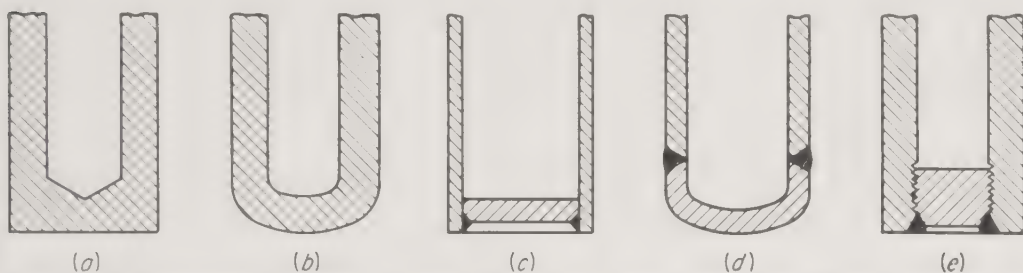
Permanent closures. [From D. Meigs, *Trans. Am. Inst. Chem. Engrs.*, 39: 769 (1943).] (a) Solid bored end. (b) Solid forged end. (c) Welded flat disk. (d) Butt-welded preformed cap. (e) Screwed plug, welded.
